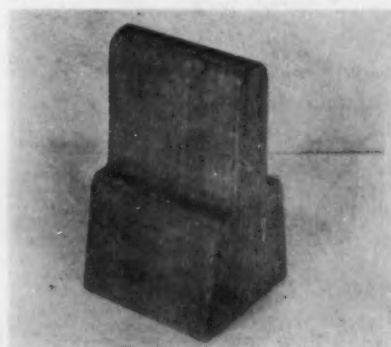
PATTERN NO. 4—COMMERCIAL TYPE PROVIDING TWO TENSILE SPECIMENS AND A BEND SPECIMEN.
